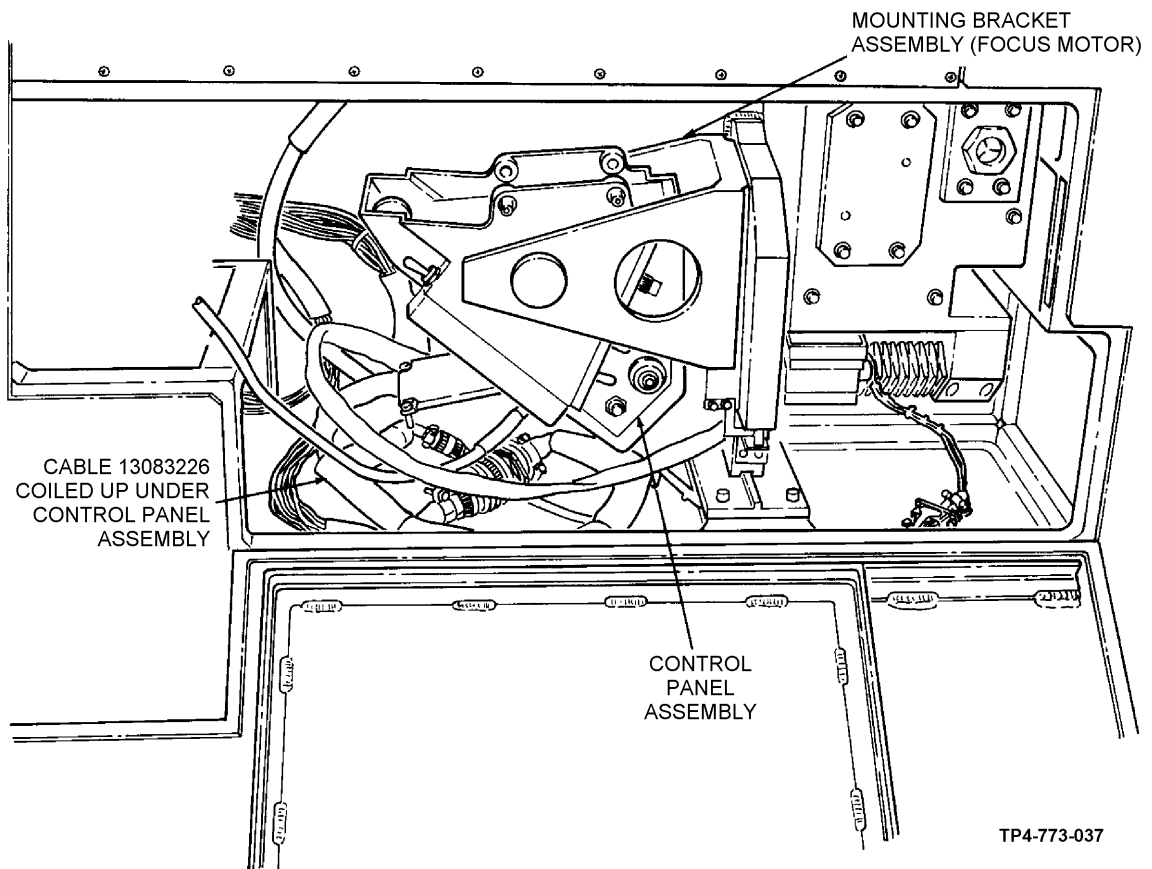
Mounting Bracket Assembly (Focus Motor) and Control Panel Assembly Properly Installed
